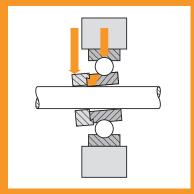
A. Shaft below suggested tolerance levels.
